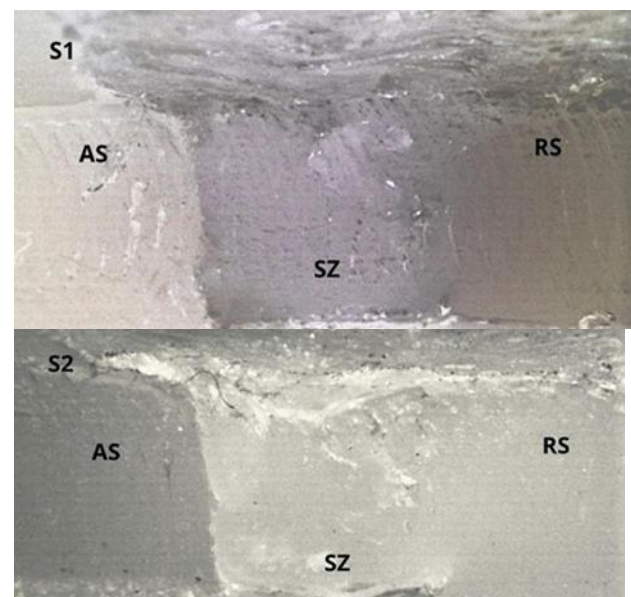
Macrostructure Results FSW Tool Threaded Cylindrical
